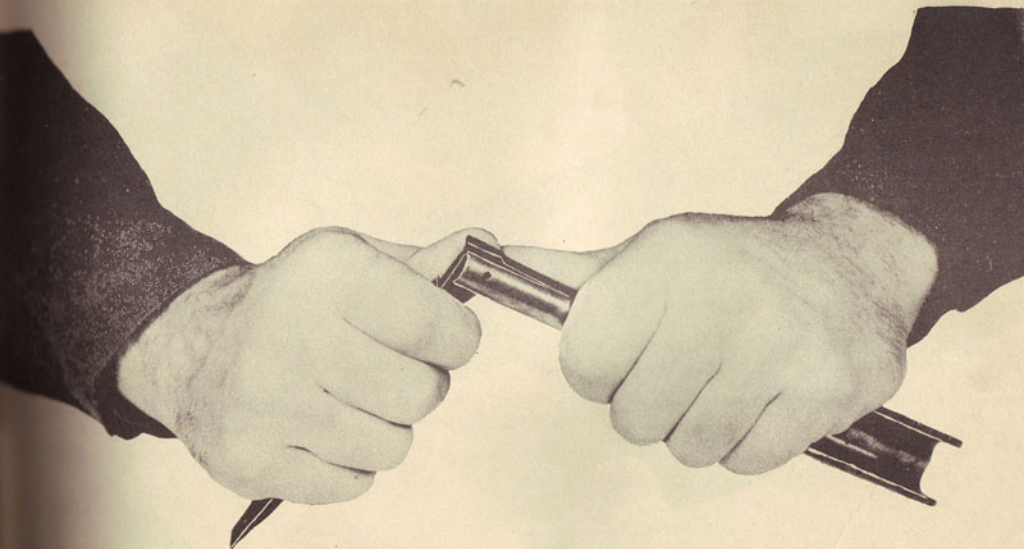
Insert a combination tool (or flange of ACTUATOR) under the head of the EXTRACTOR on the face of the bolt and pull EXTRACTOR out and up to withdraw it from its groove. (Note: Do not lift EXTRACTOR higher than necessary for lug to clear anchorage hole as otherwise setting or breaking may occur).
